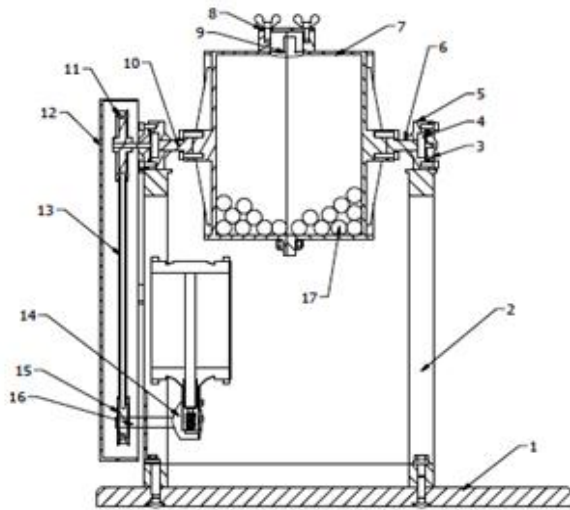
Equipment for grinding metal waste (Ball mill); scheme of the ball mill: 1 – Mill bed, 2 – Frame, 3 - Bearing cover, 4 – Bearing, 5 - Bearing Support, 6-10 - Drive shafts, 7 – Mill case, 8 - Cover, 9 – Admission hopper, 11-15 – Belt pulley, 12 – Case, 13 -Drive Belt, 14 – Motor, 16 - Motor shaft, 17 – Balls
